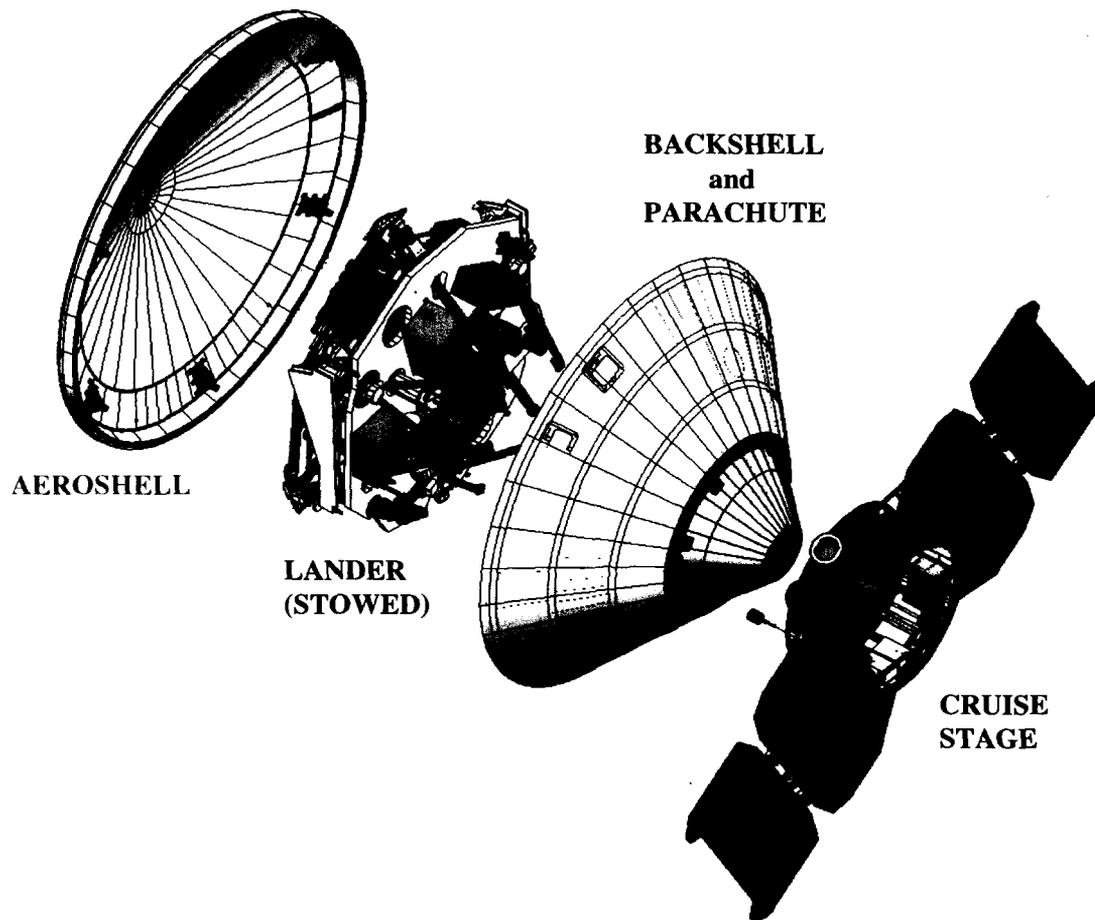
Exploded view of Urey system showing cruise, lander, and aeroshell / backshell
